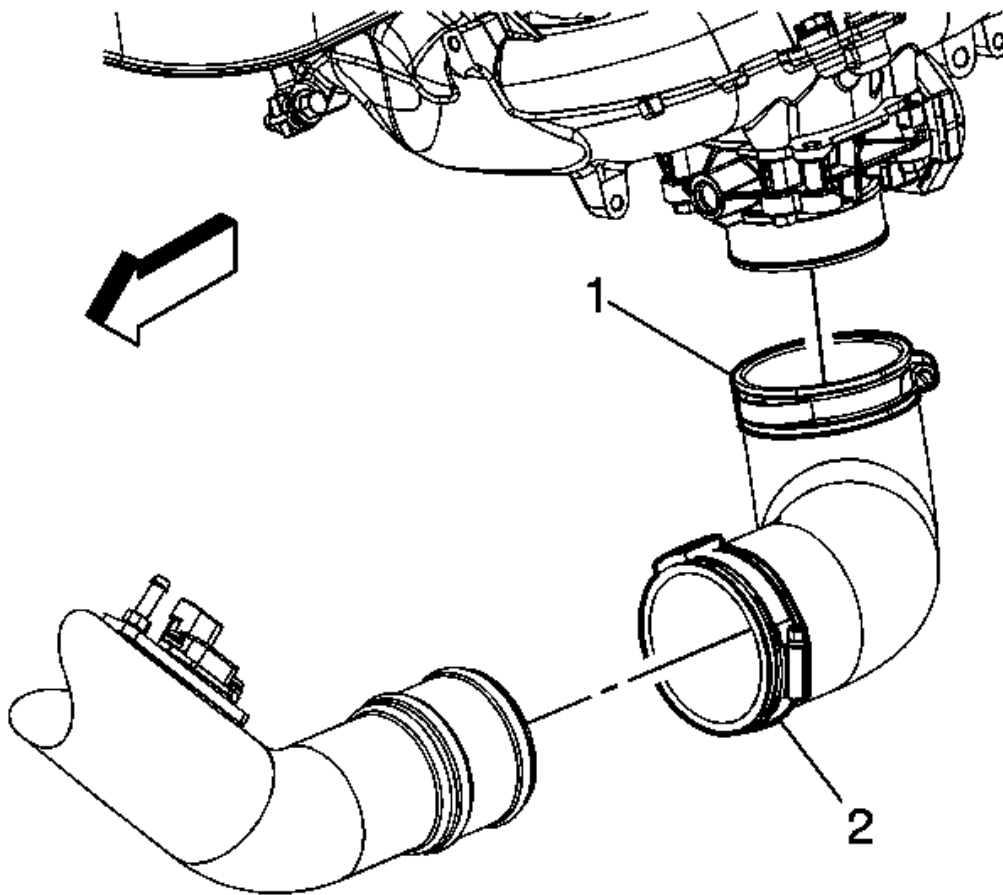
View Of Charge Air Cooler Hose & Clamp
